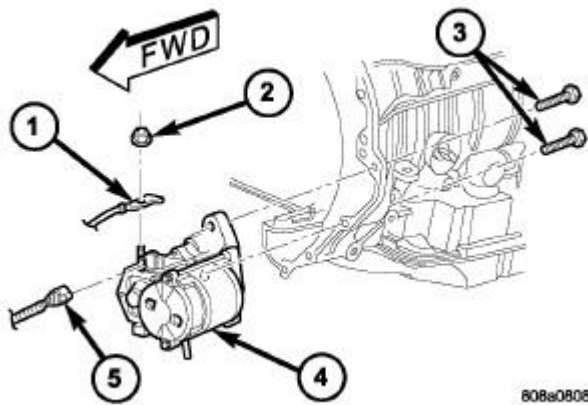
STARTER REMOVAL/INSTALLATION - 3.7L/4.7L - AUTOMATIC TRANSMISSION
